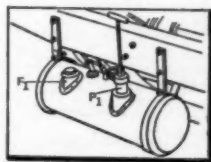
Reserve oil tank located outside the chassis frame on the Lozier
